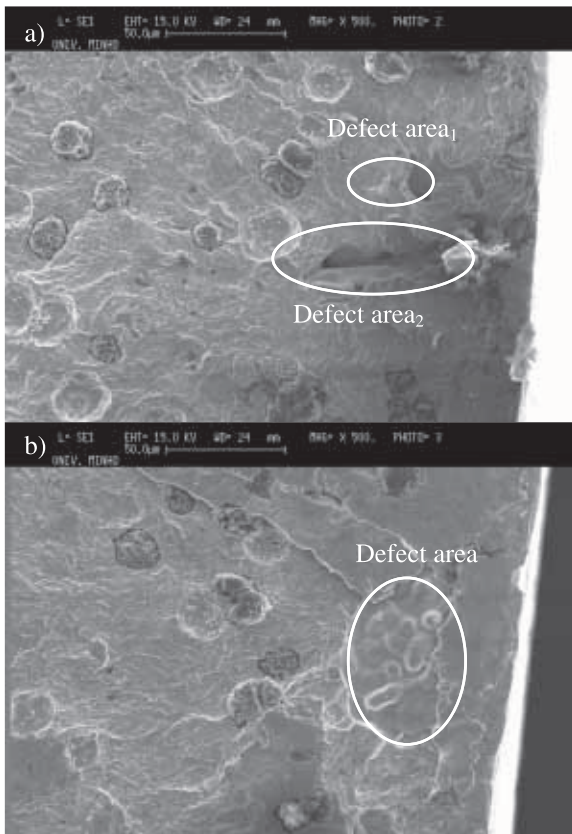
a) fracture surface of sample 4 (defect area₁=543 μm^2 ; defect area₂=1.300 μm^2); b) fracture surface sample of sample 6 (defect area = 2.684 μm^2)
